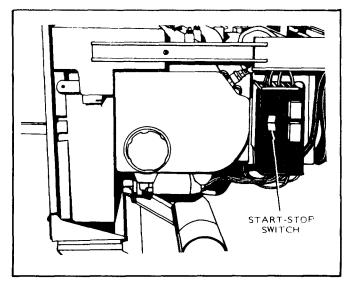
PLANT MOUNTED START-STOP SWITCH
